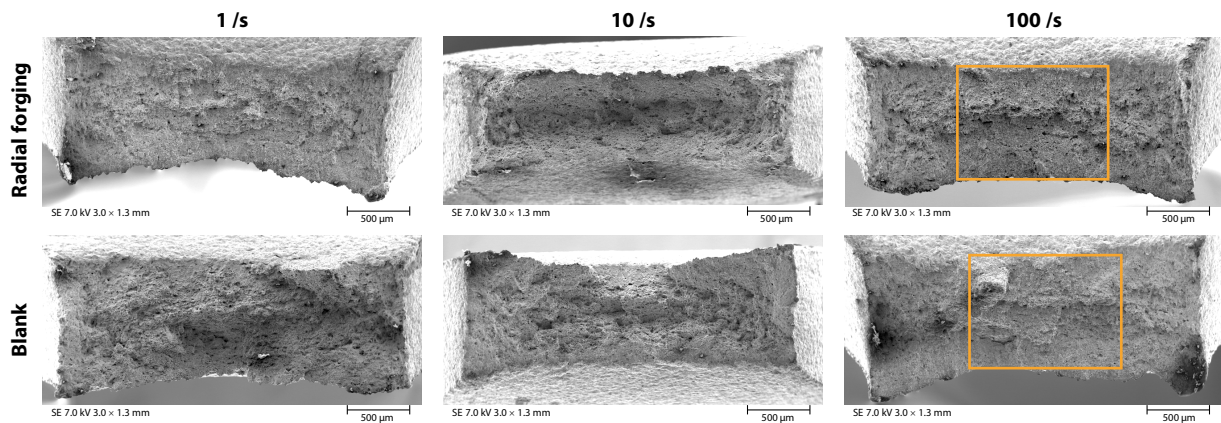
Secondary Electron Image of Fracture Surface after High-Speed Tensile Test
